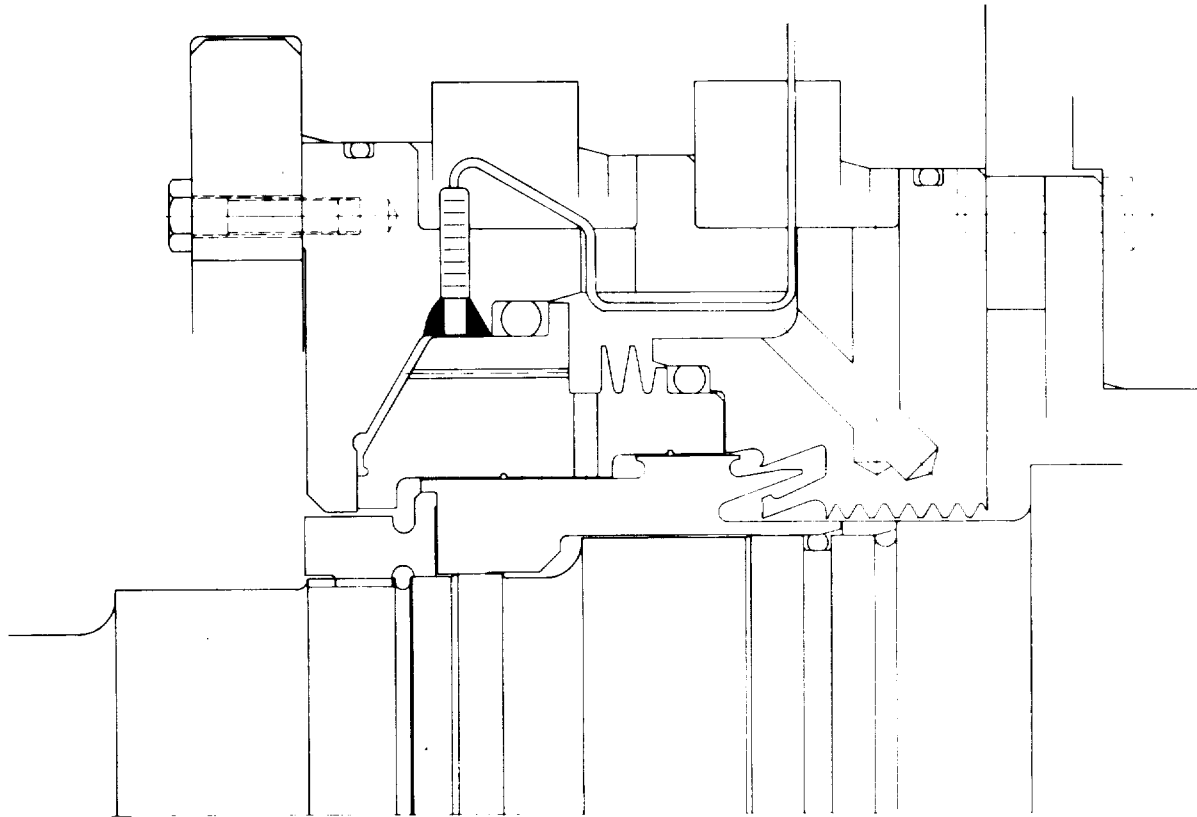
Probe arrangement for trapped bushing seal vibration test.
